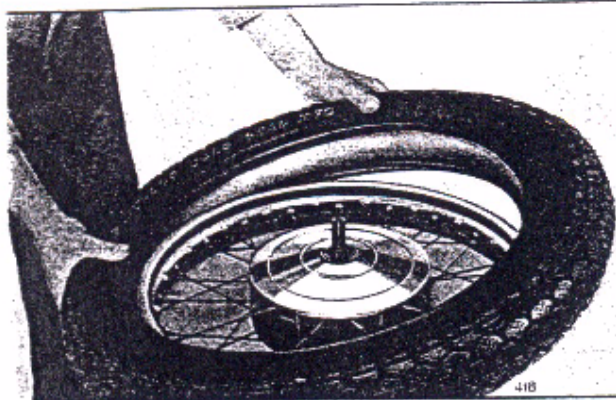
Refitting the tyre to the wheel. Note valve engaged in rim hole
